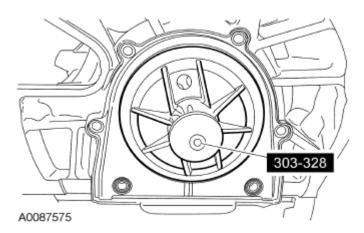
Identifying Crankshaft Rear Main Oil Seal Installer Courtesy of FORD MOTOR CO.
